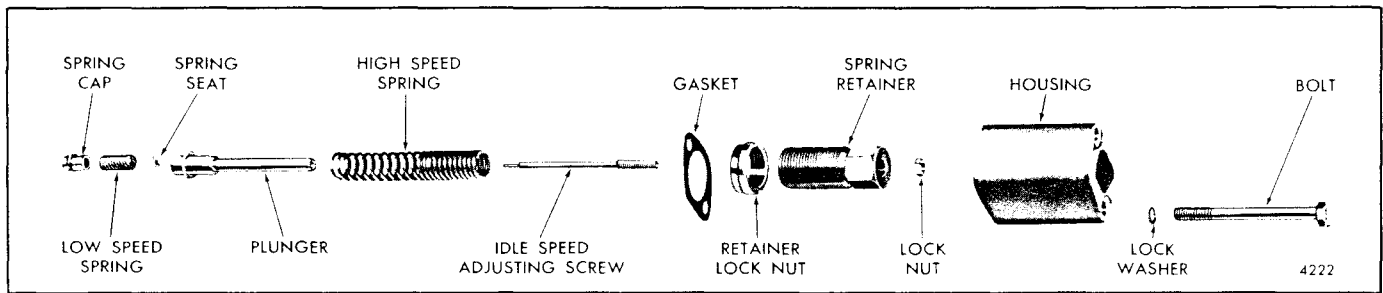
Governor Spring Assembly Details and Relative Location of Parts
